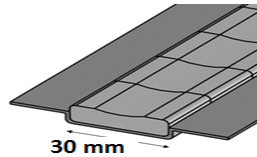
Ceramic backing strip with rounded groove used in GMA welding.
